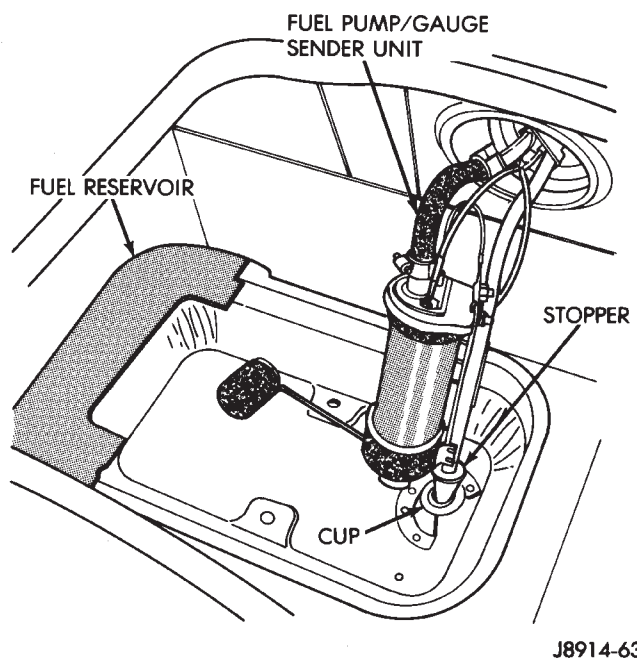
Fuel Pump Module—XJ Models—Disassemble/Assemble
